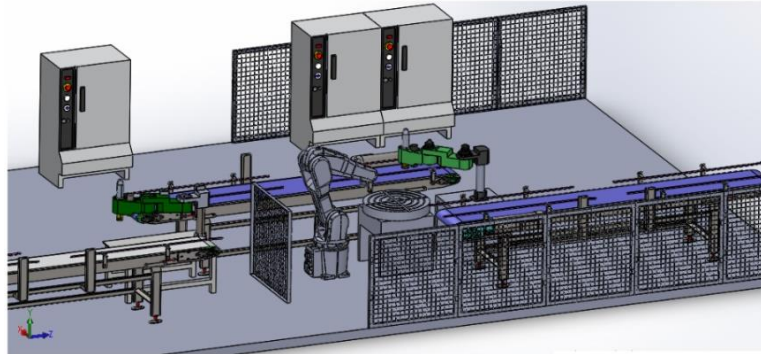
Electronic card Machining and Assembly Process developed in SolidWorks
